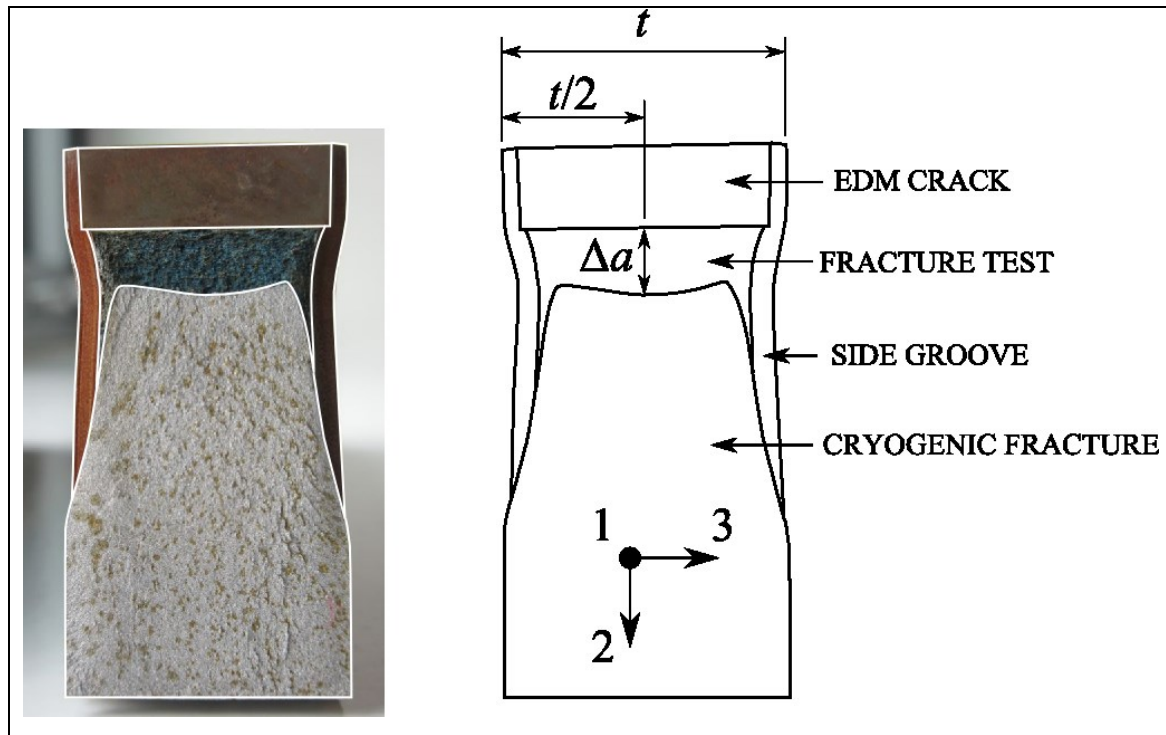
Trace (right hand side) of the fracture surface (left hand side) of one of the steel specimens after being broken apart by cryogenic fracture.
